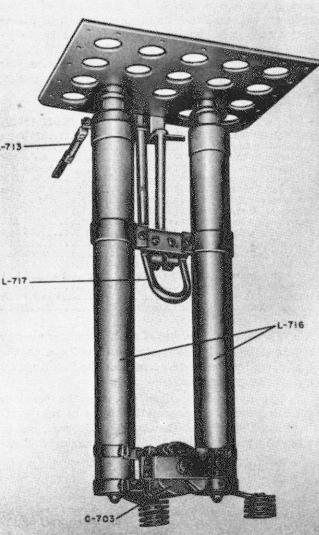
FM-3 Driver Amplifier Plate Tank Assembly
